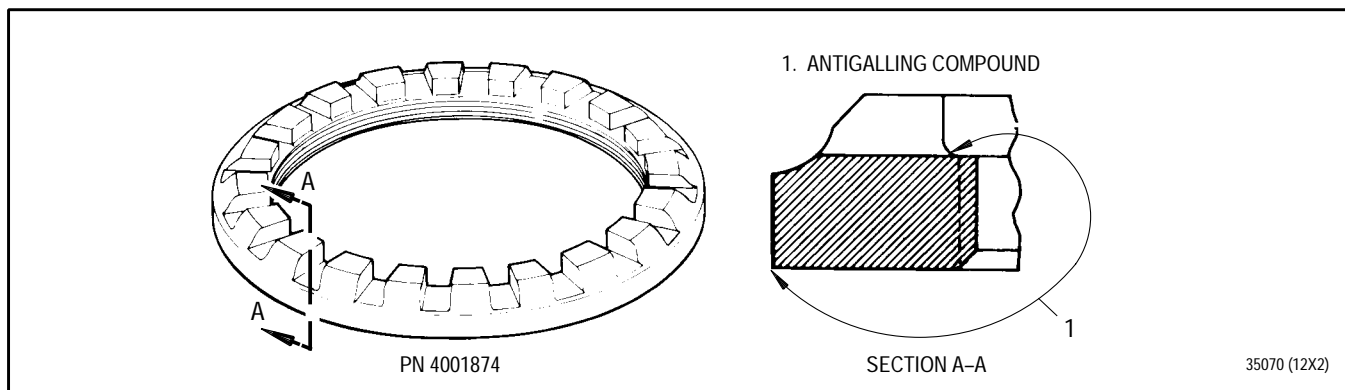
Bearing Retaining Nut (PN 4001874) - Inspection
